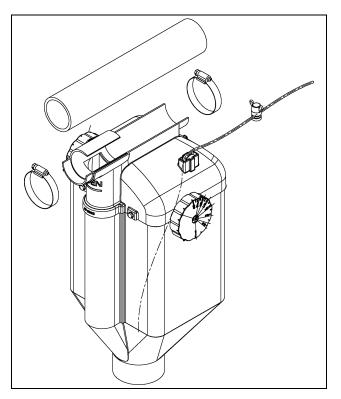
M Ultra-Drop Feeder on Welded Steel and PVC Tubing (AP-3800)
